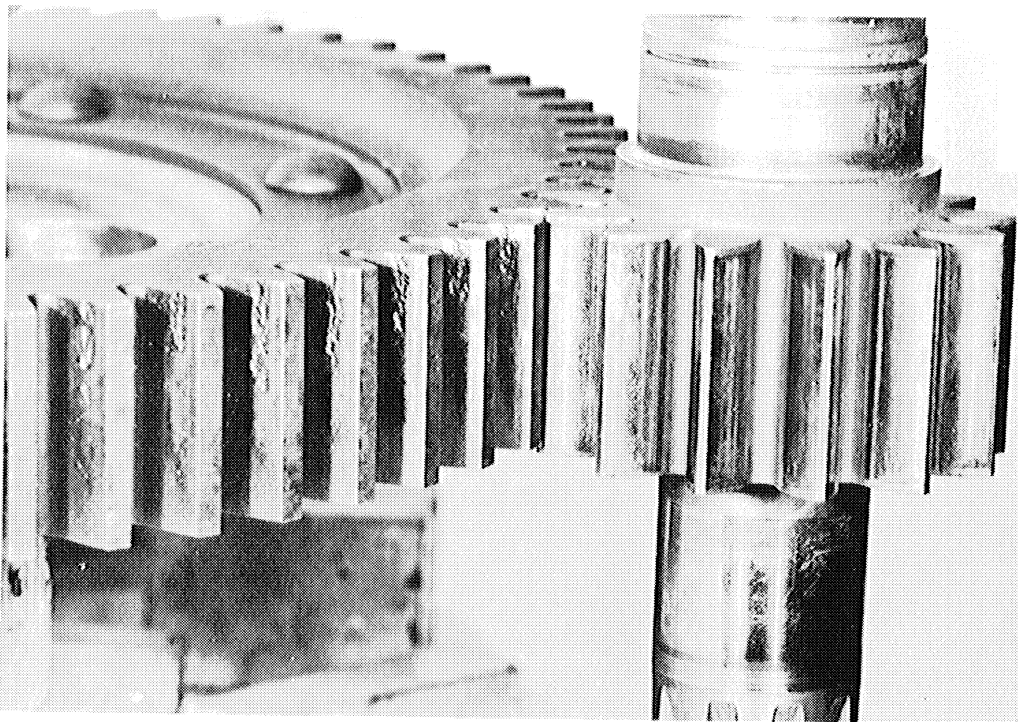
Farm tractor bull gear and pinion showing end contact and pitting. Pinion carburized and hardened to Rockwell C 62. Gear furnace hardened and drawn to Rockwell C 52. 1150 hours of heavy field use.
